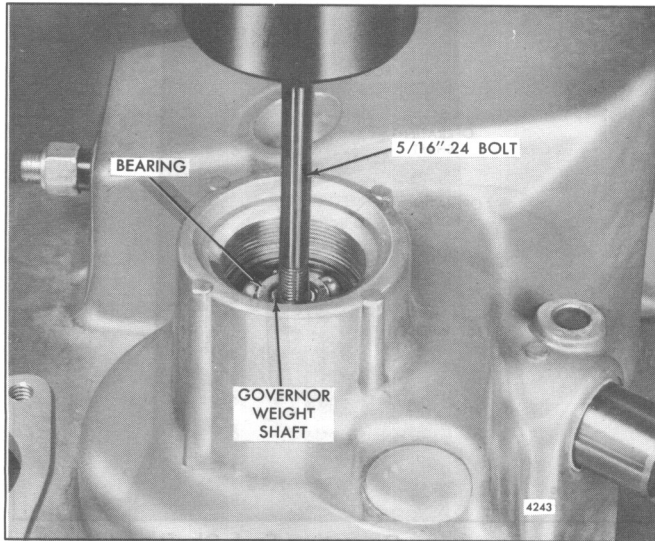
Removing Governor Weight Shaft Assembly from Governor Housing
